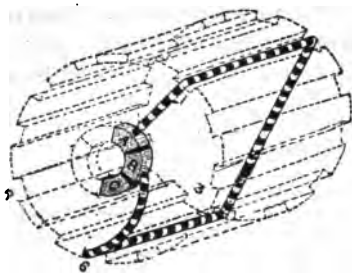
,572.—Skeleton view of wooden armature core showing in position the first coil of the winding indicated in the table below.
